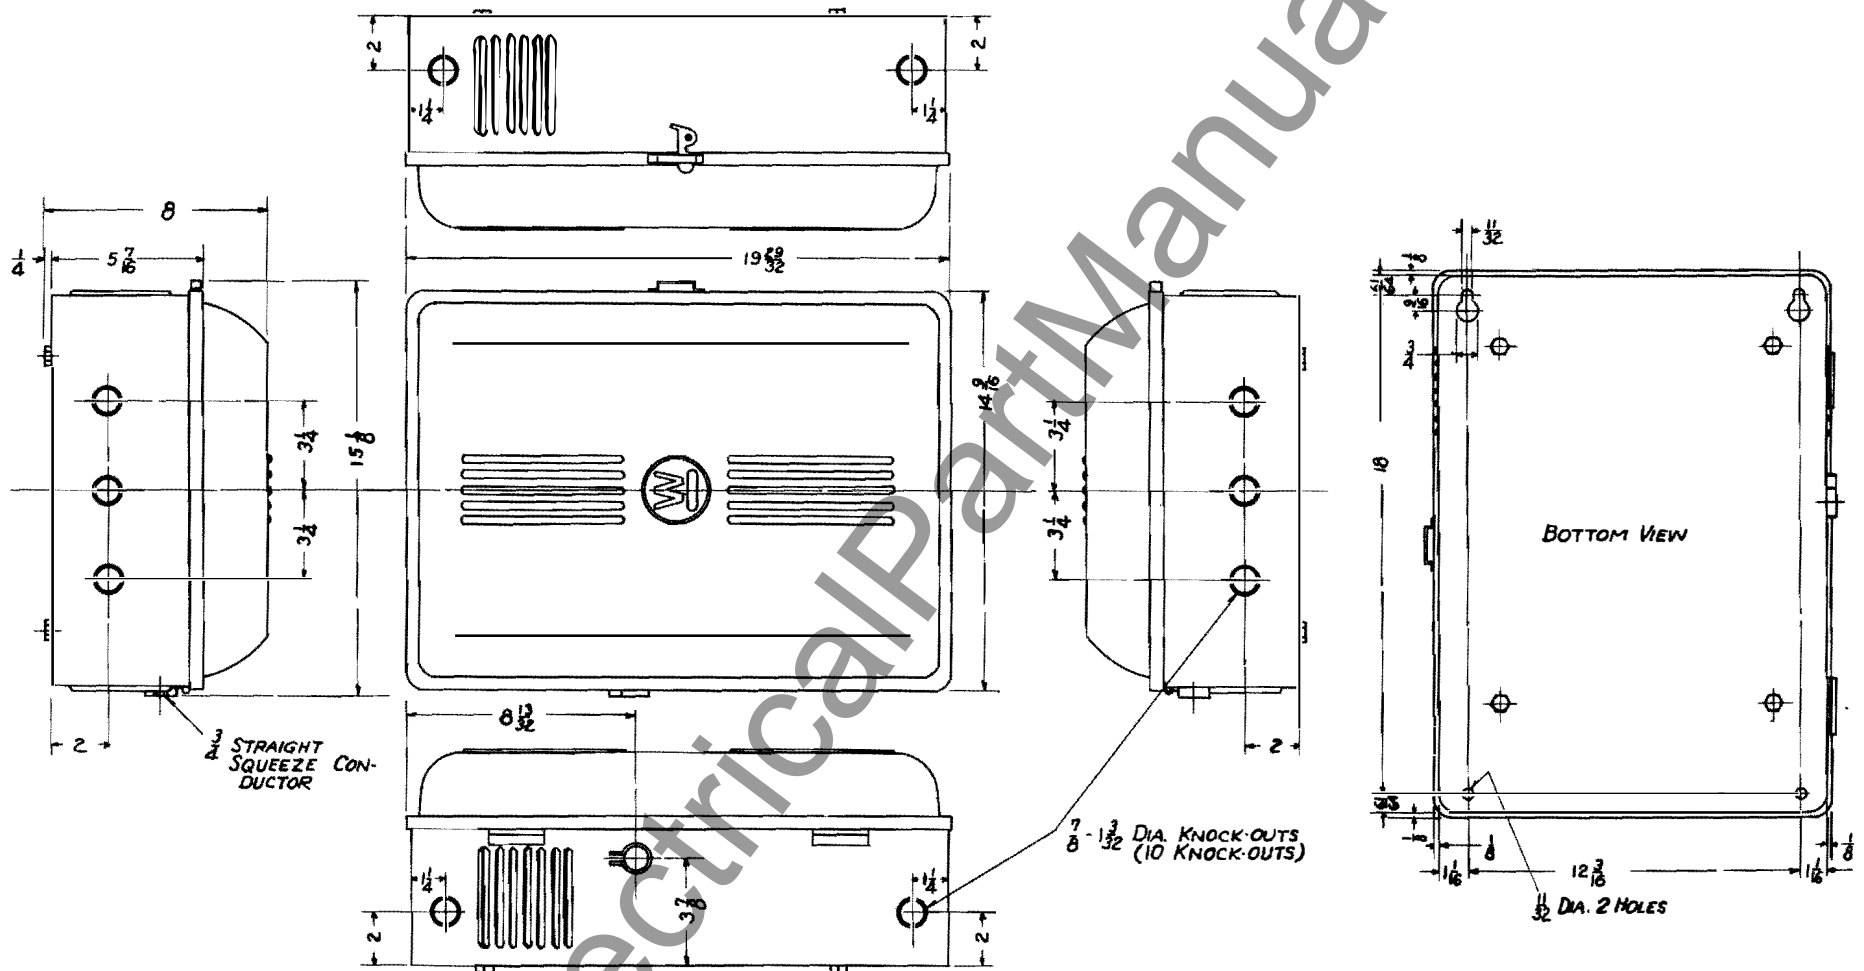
Type RR-5 Register Regulator - Outline Dimensions
